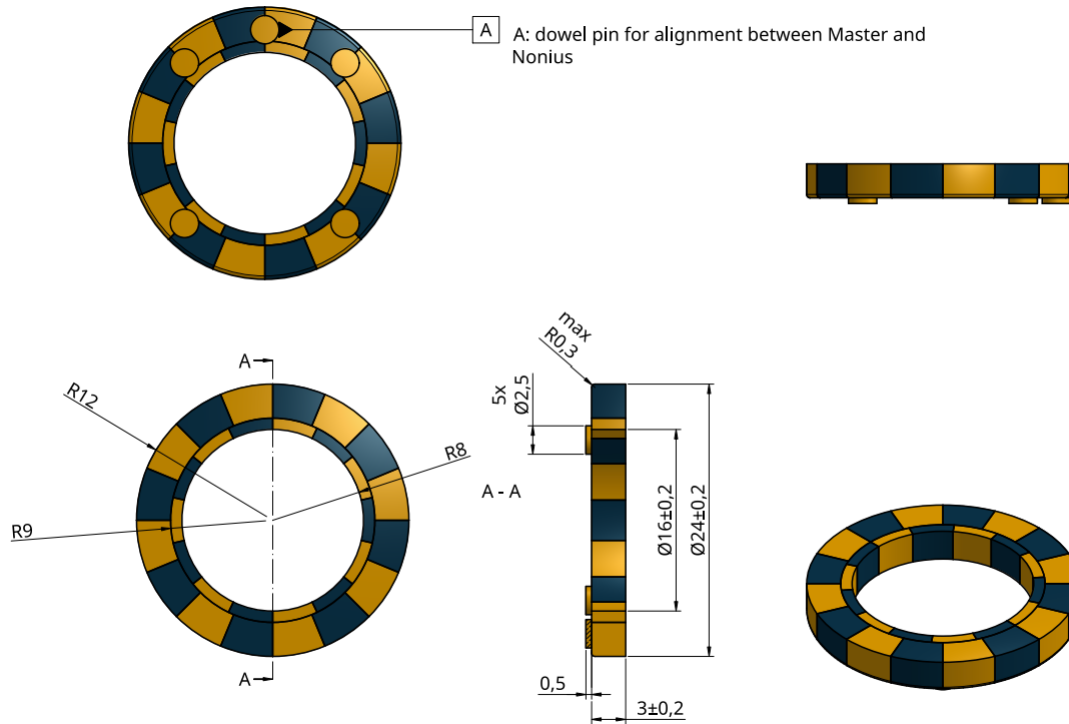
Dimensions of MLXMAGNT-VER-004. Unless specified otherwise, dimensions are millimetres.
